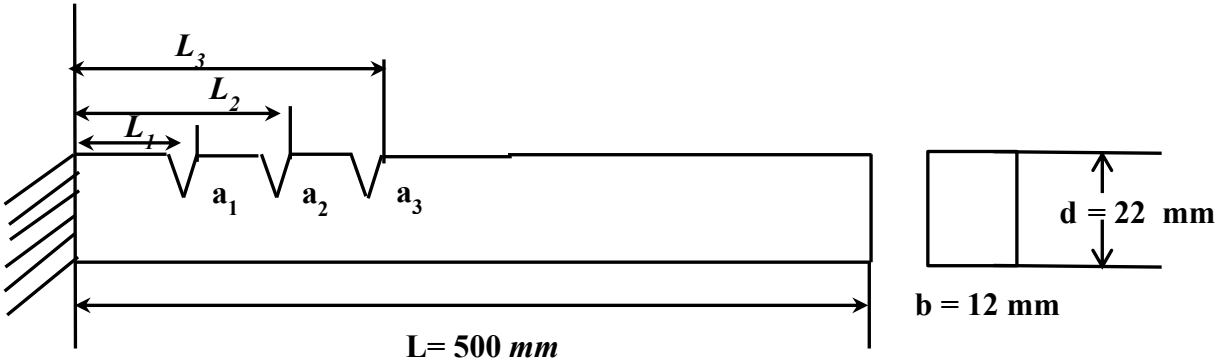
Sketch of multiple cracked uniform cantilever beam of rectangular cross-section
